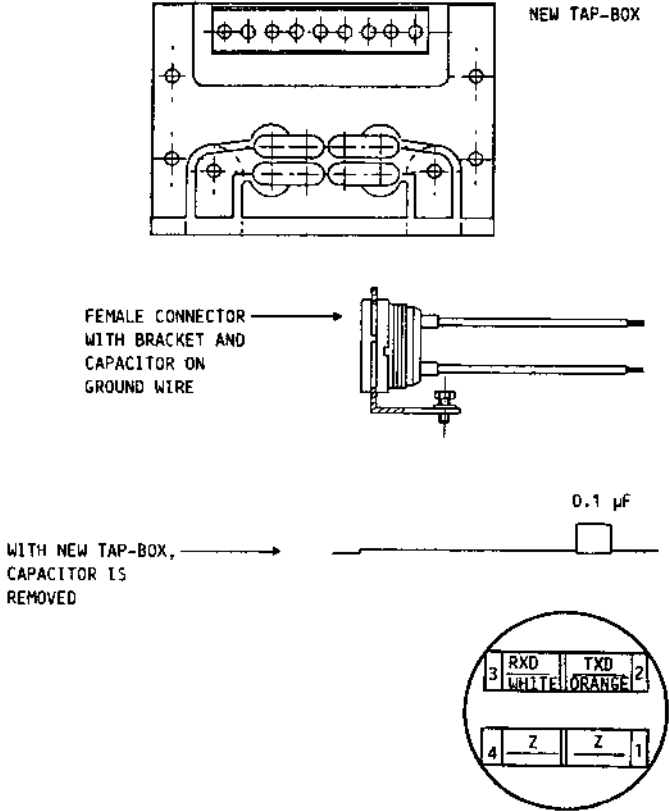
TAP-BOX With Capacitor Mounted on Printed Circuit
